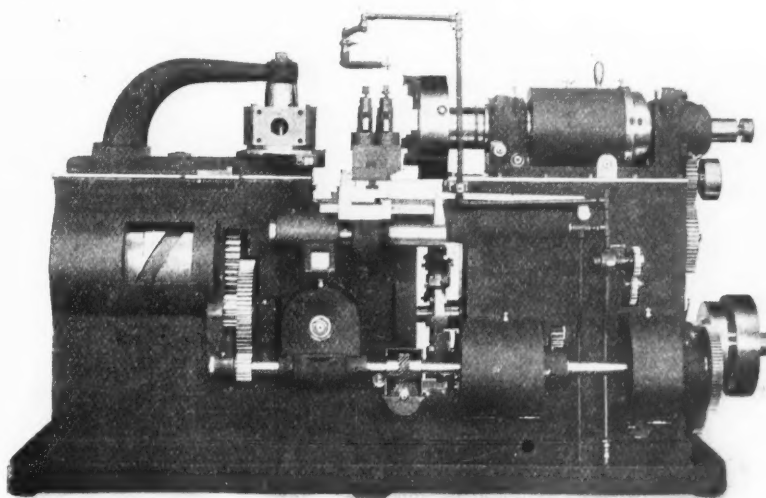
Rear View showing the Feed Shaft and its Connections with the Governing Disk and Cross- and Turret-slide Cams.
